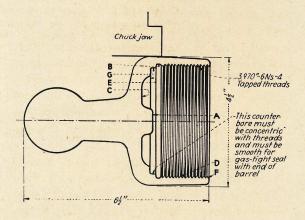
Two chuckings are necessary for turret lathe operations on the forged-steel base cap. The set-up shown is used for the cup end, a similar arrangement on the same machine finishes the ball end
